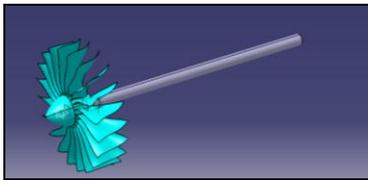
A shaft with a vane wheel of a plane engine (CAD model)
